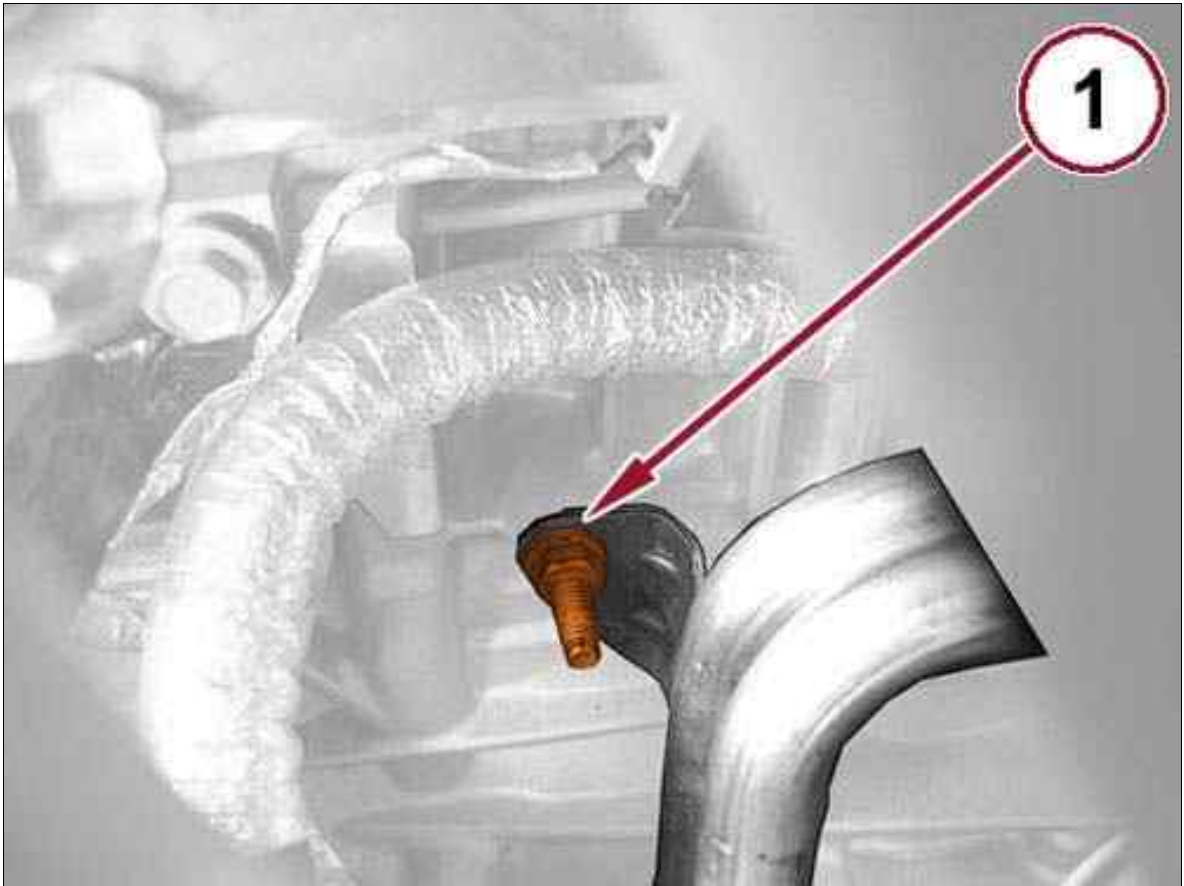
Upper Oxygen Sensor Wiring & Retainer
